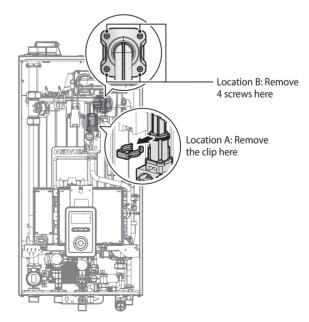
Detaching the Gas Valve Outlet Adapter from the Gas Valve and Fan Motor Assembly
